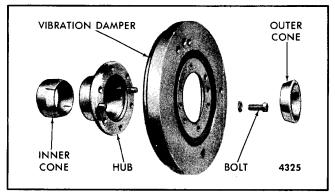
Vibration Damper Details and Relative Location of Parts
